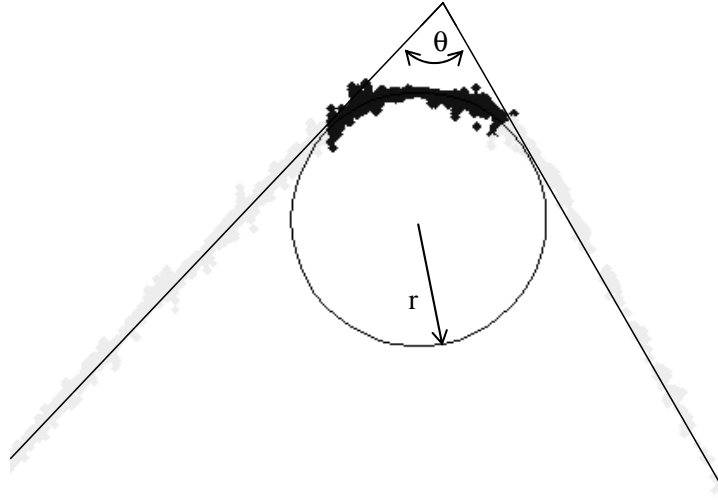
Angle (θ) and radius (r) for honed edge tool insert
